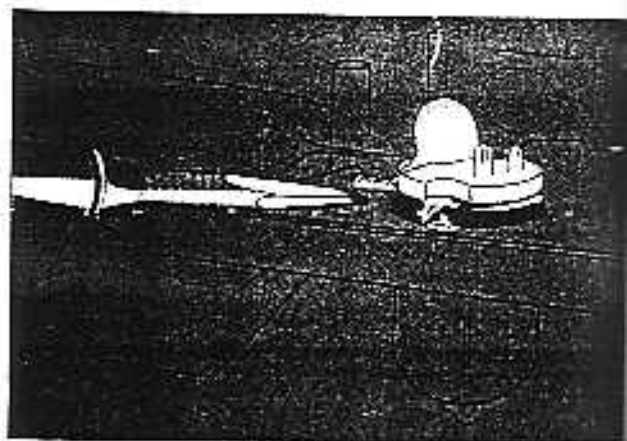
Soldering to a terminal. Note the slight fillet of solder exaggerated for clarity--formed around the wire.
